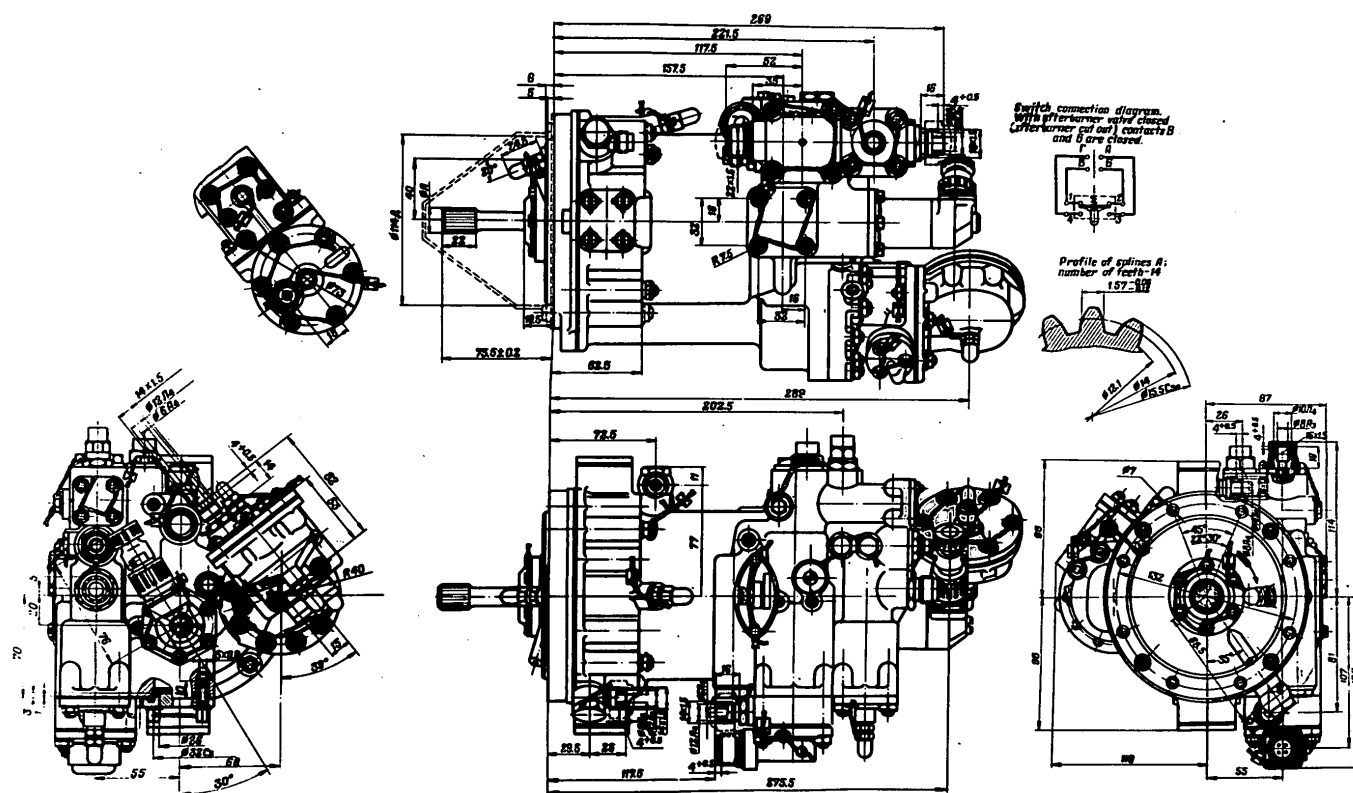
HP-11A and HF-11A Units Assembly Drawing
